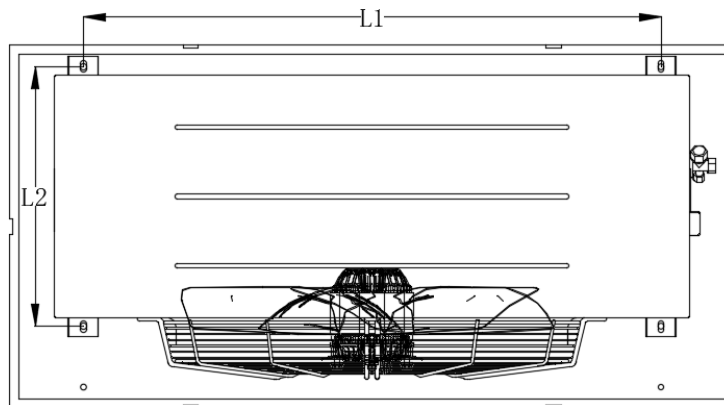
ECOND018 Dimension drawing of the mounting base
